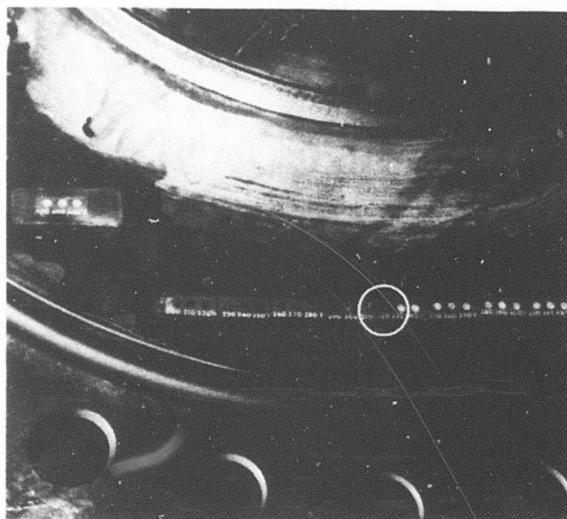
Thermal Plaques on the Bevel Gear Support Shaft Following the Input Bevel Gear Failure, $300^{\circ}\pm 15^{\circ}\text{F}$ Oil Out. Circle Indicates Maximum Exposure of 320° .
